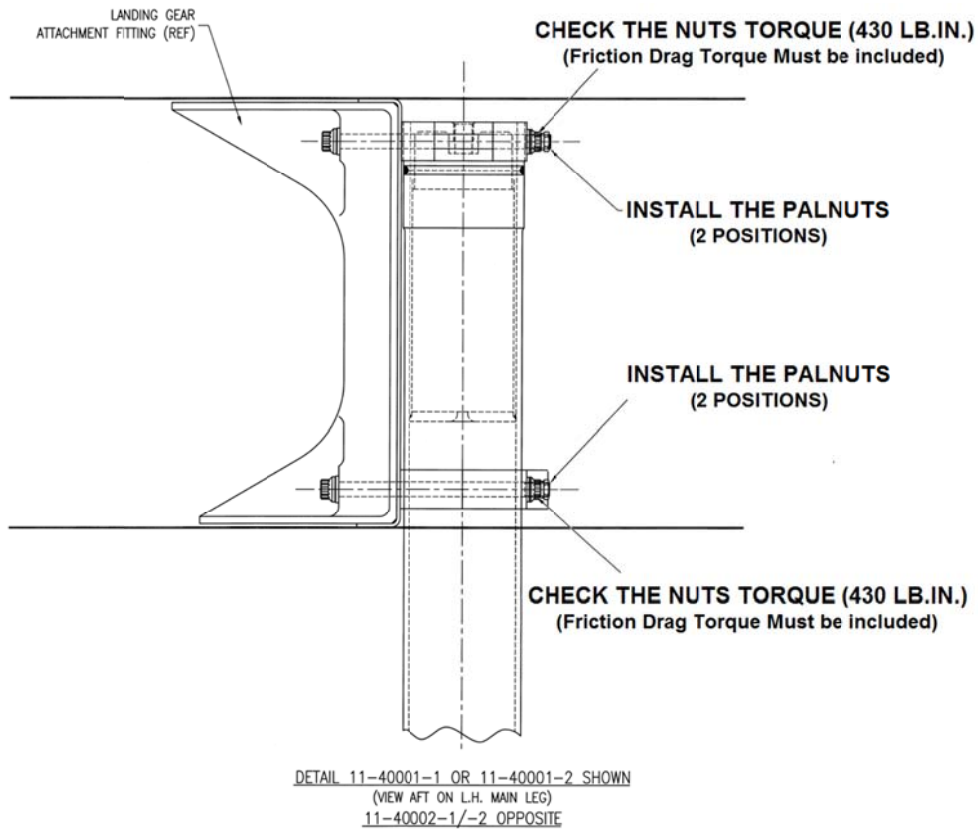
MAIN LANDING GEAR (SHORT RANGE WING – TORQUE CHECK AND PALNUTS INSTALLATION)
